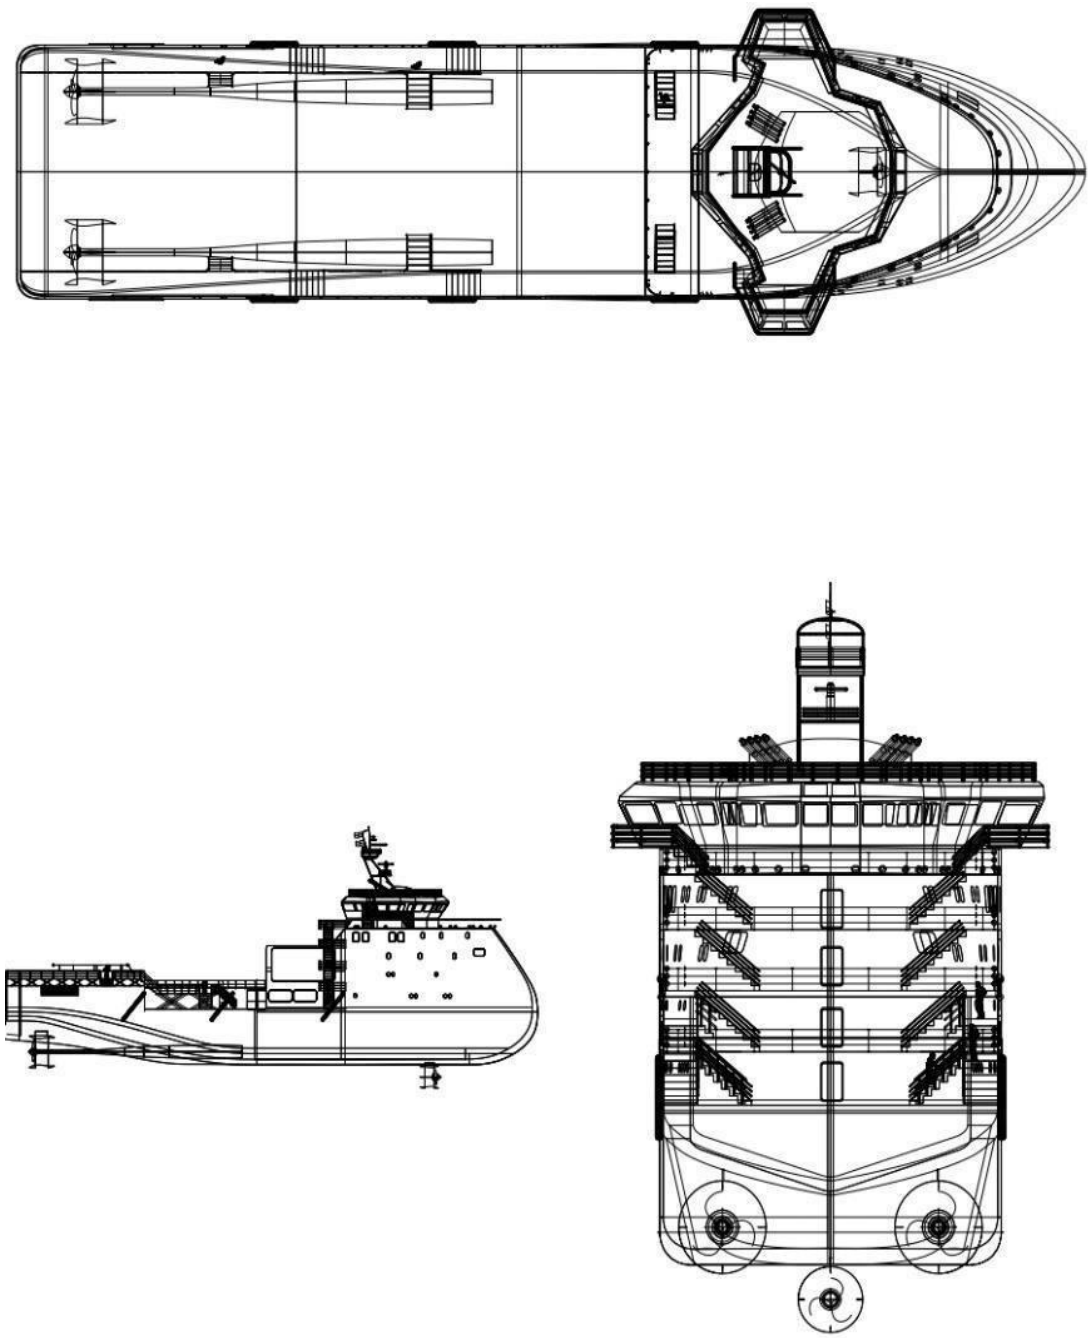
A paper sheet image of prototype design using Rhino
